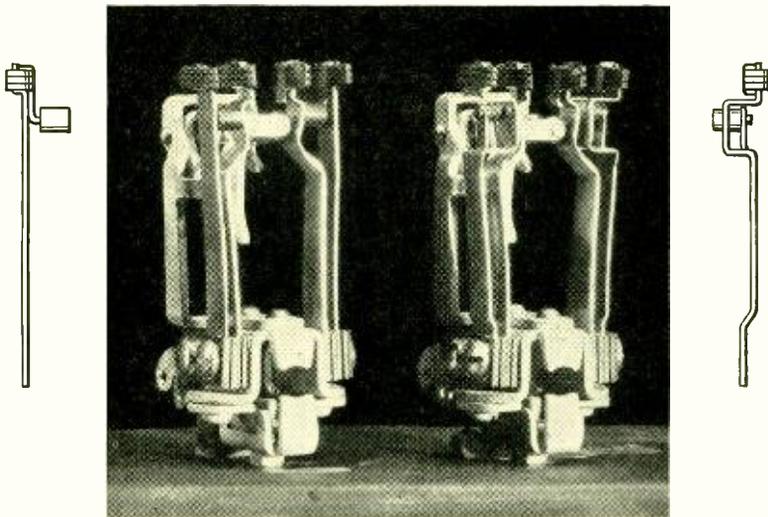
Selector brushes with flexibly mounted shoes (right) cause less circuit noise than those with straight springs (left). The outside springs of the older type are straight while those of the new type have a U bend near the shoes
